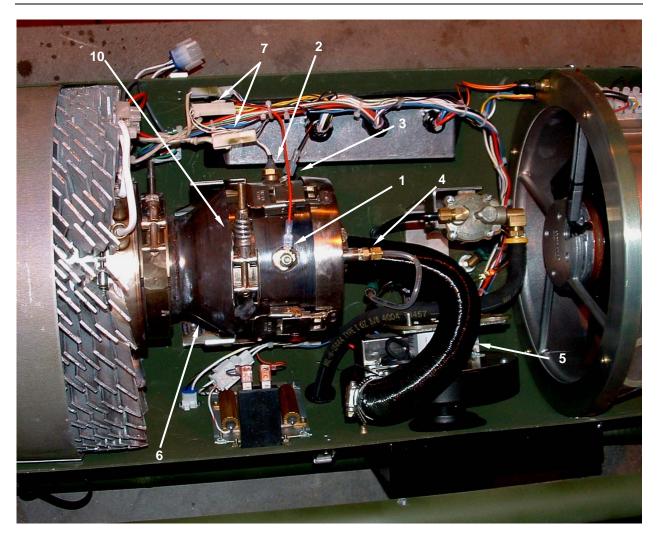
Replace Fin Temperature Sensor – Disassembly.
